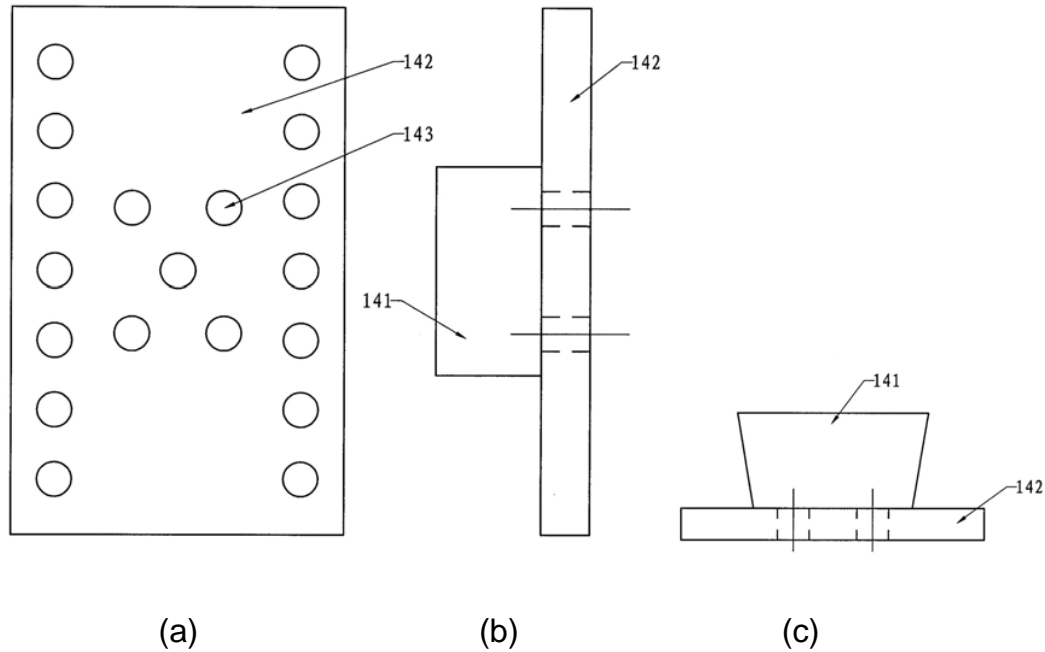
Configuration of the coupling mount on the LST-mill stands: (a) structural view of a coupling mount of the mill in Figure 2.2; (b) left view of the coupling mount in Figure 2.4 (a); (c) top view of the coupling mount in Figure 2.4 (a)
